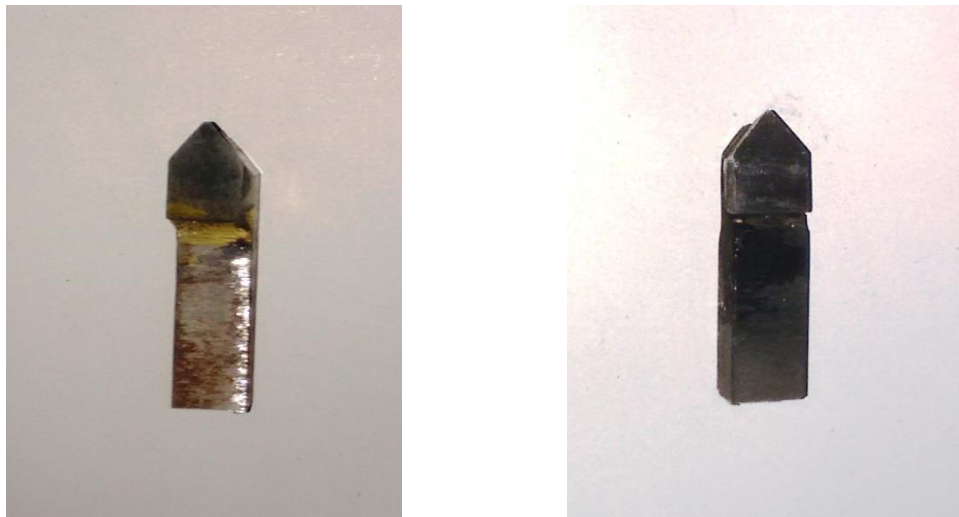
Uncoated HSS tool and CNT coated HSS tool
